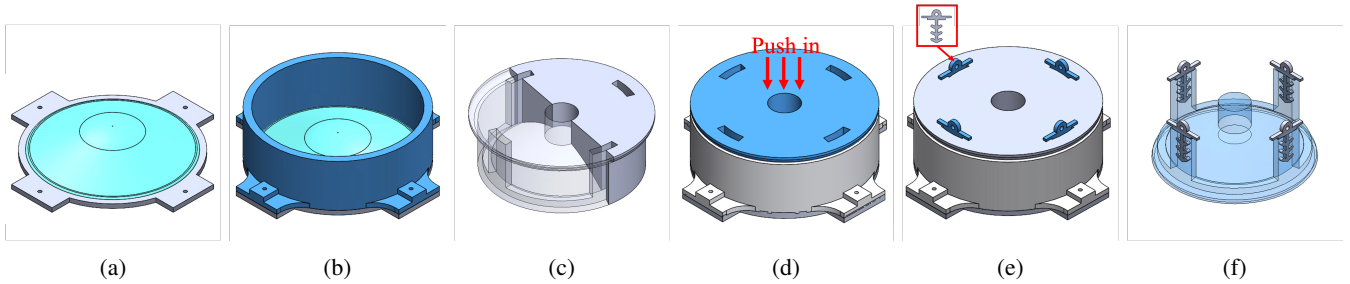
Fabrication process for the soft suction cup. (a) Coating a thin layer of XTC-3D (light blue color) on the bottom mold to fabricate a smooth surface. (b) Combining the wall mold with bottom mold, then the dragon skin is filled into the mold until half level. (c) The cross-section view of top mold. (d) The top mold is slowly pushed into the combined mold. (e) The pullers (top left sketch) is placed in the four holes, additional dragon skin is poured to fill into the mold fully, and the mold is placed into the vacuum to remove the bubbles inside the dragon skin 30. (f) The suction cup can be demolded after four hours curing.
